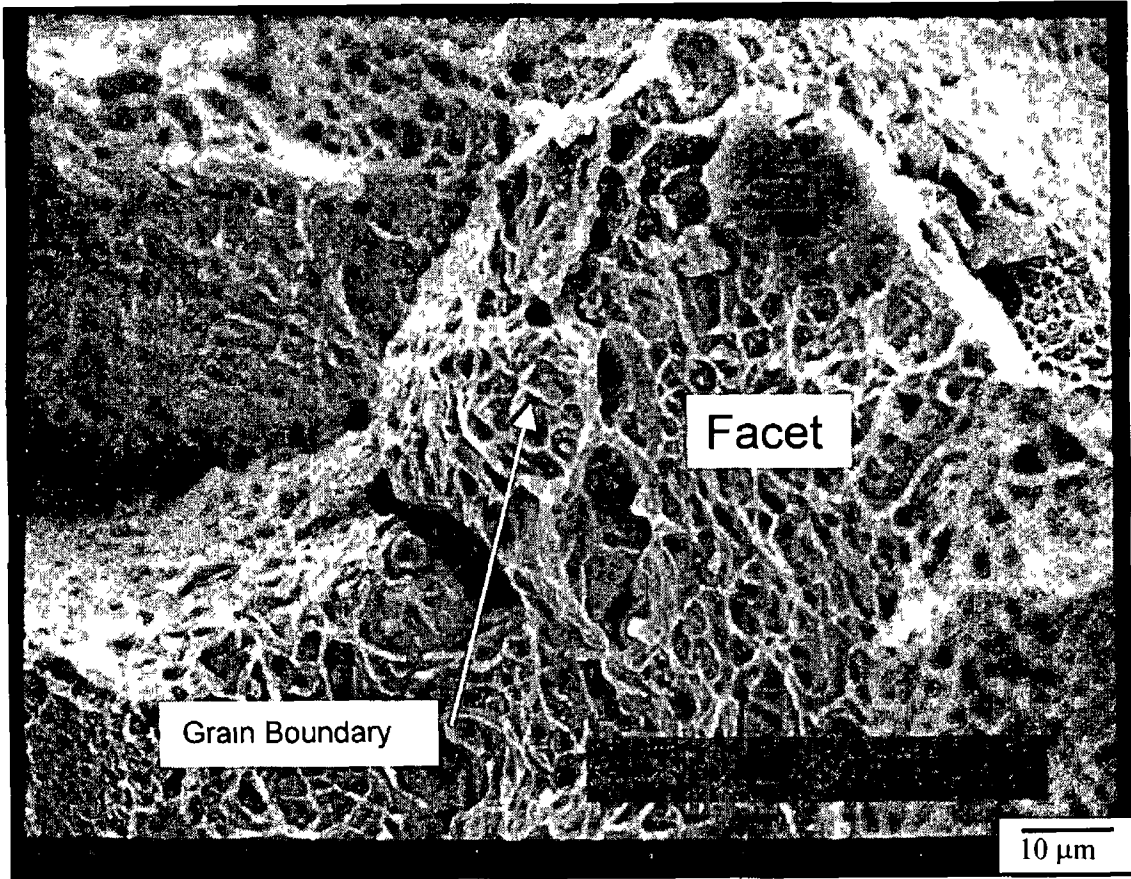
9a Fractured surface after tensile of one hour heat treated workpiece
